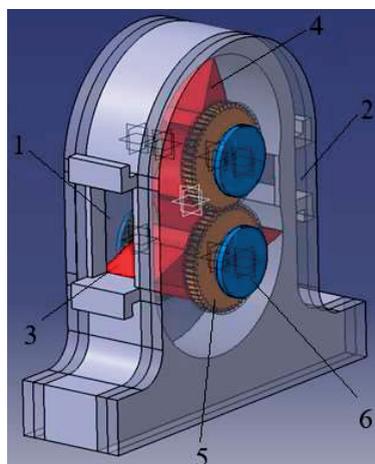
Axonometric view of the volumetric rotating machine model with profiled rotors:
